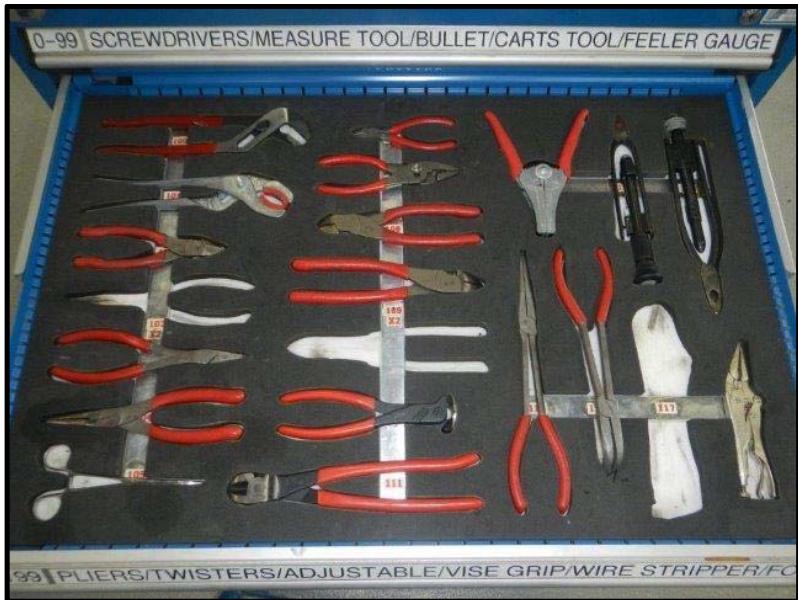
An example of drawer 2 of tool kit in use at 425 SQN
